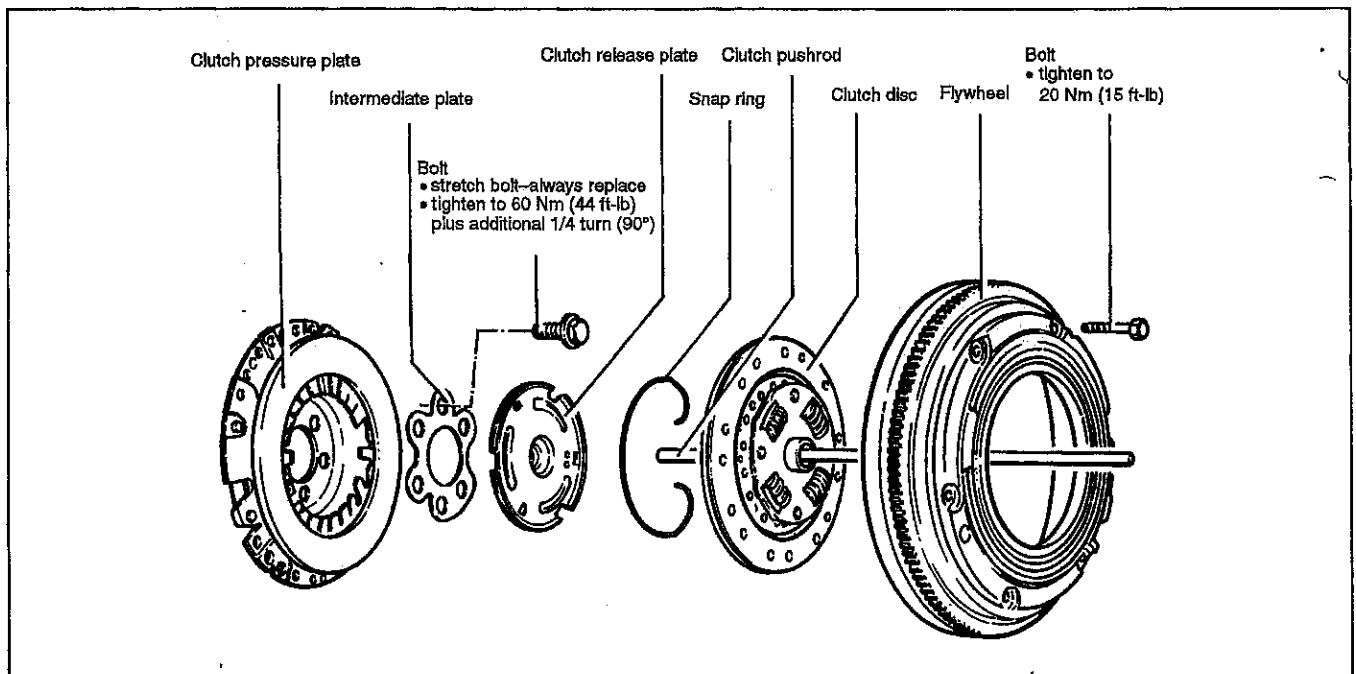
Flywheel and clutch assembly on cars with ACC, ABA, and AAZ engines with manual transmission.
